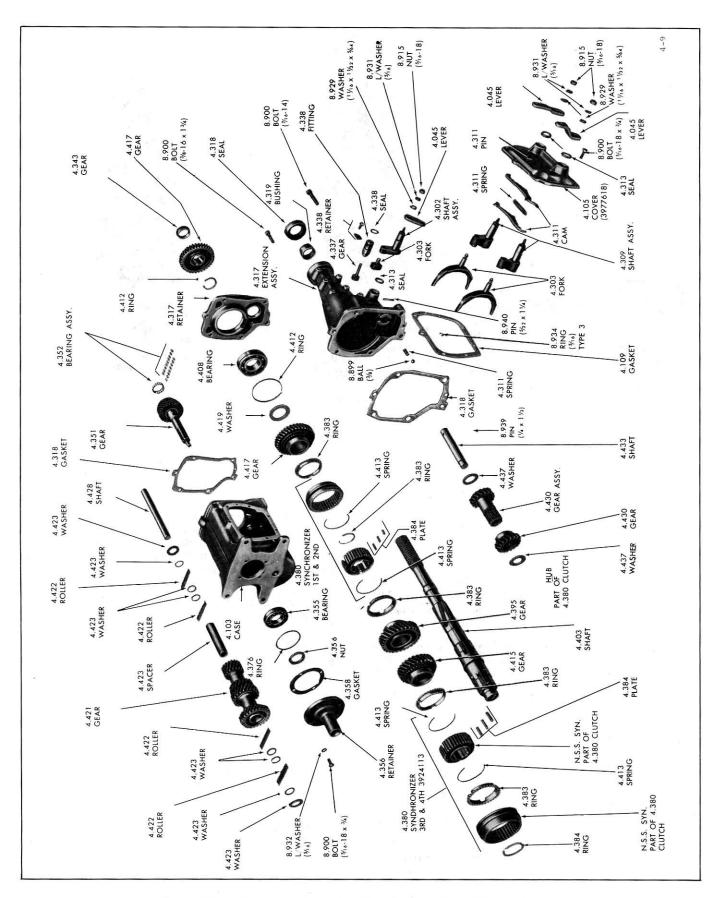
Exploded view of a Muncie Four Speed transmission.
